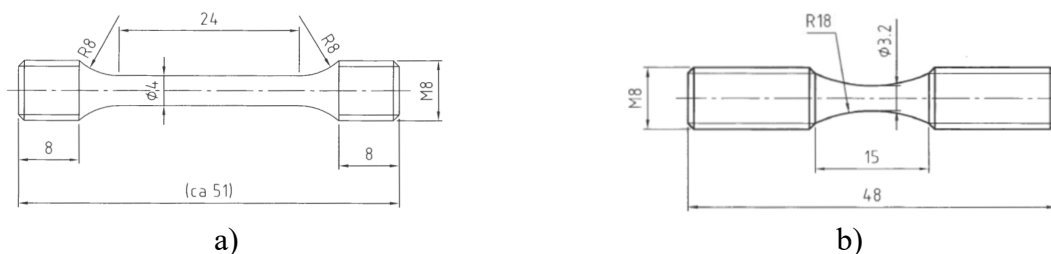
Geometry of the tensile (a) and fatigue (b) test specimens
